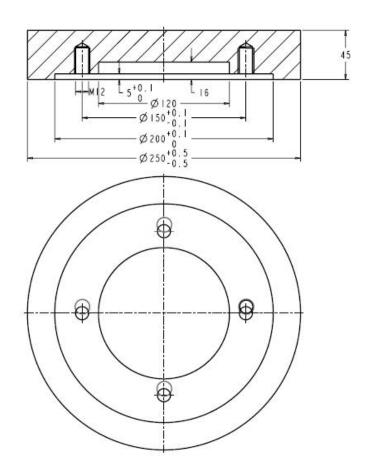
Technical Drawing of the Upper Blanking Supporting Die
